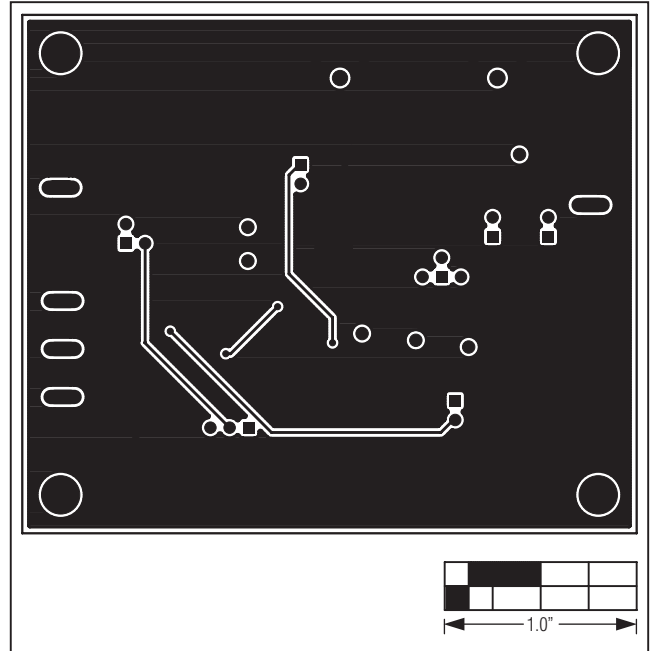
MAX16946 EV Kit PCB Layout—Solder Side
